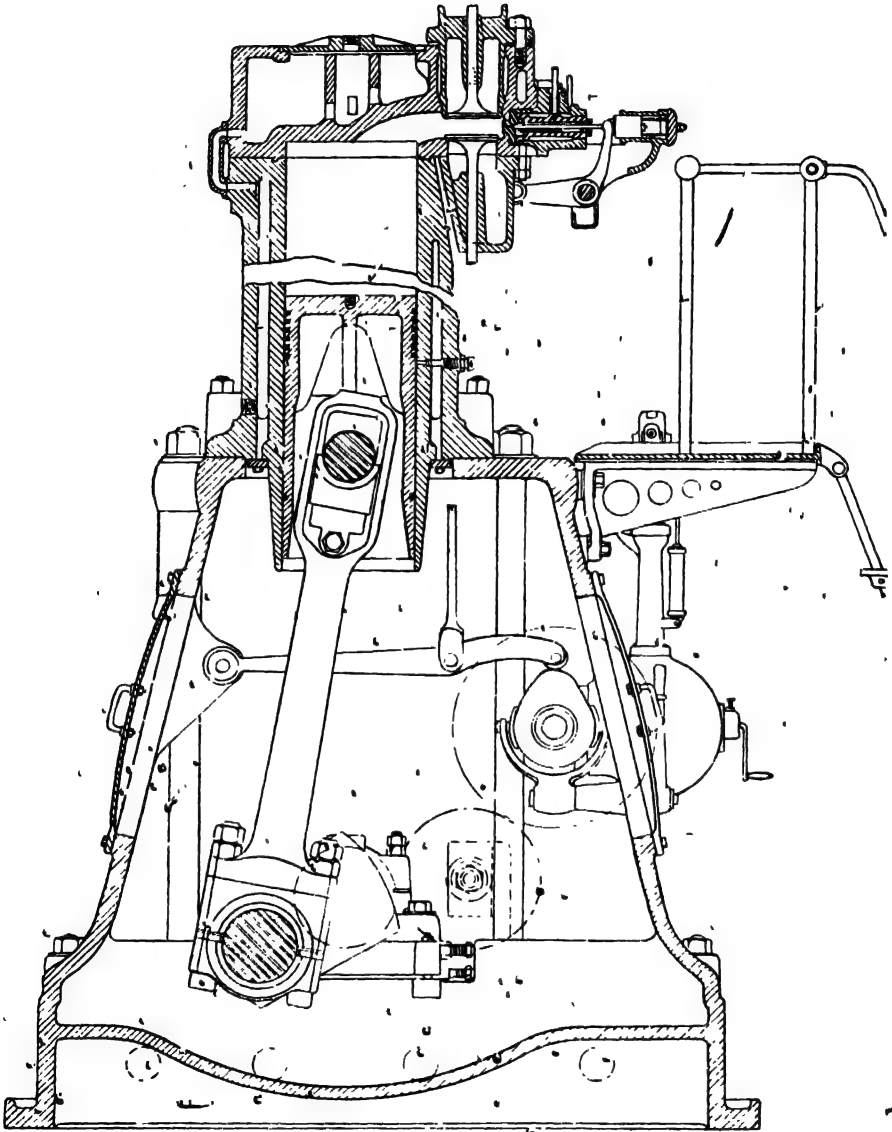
Sectional View of Busch-Sulzer Diesel Oil-engine
